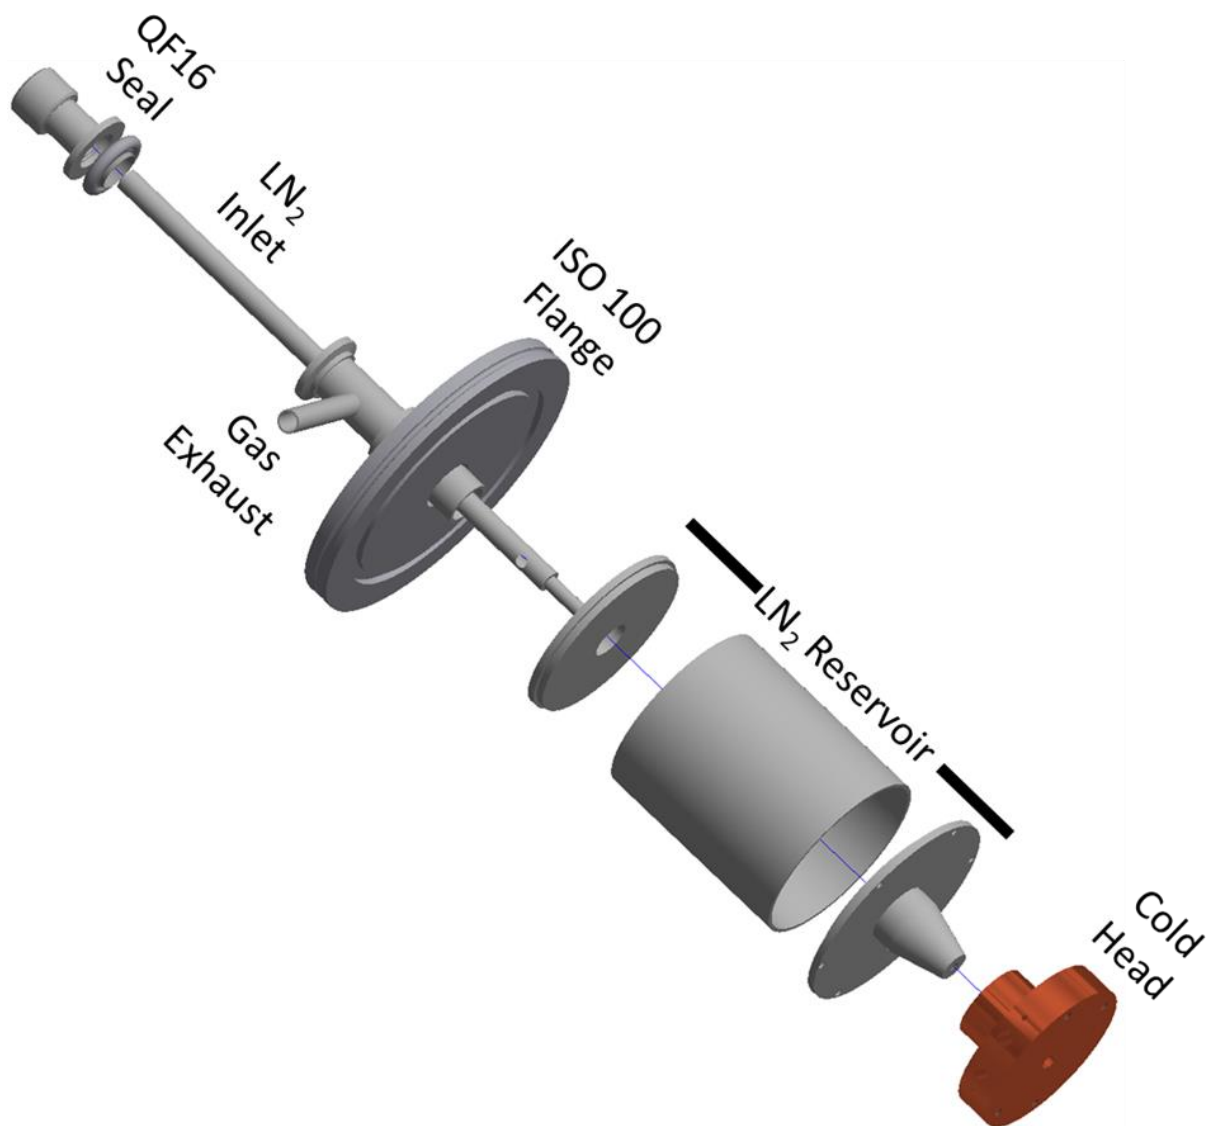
CAD and exploded view of prototype LN₂ cryostat.
